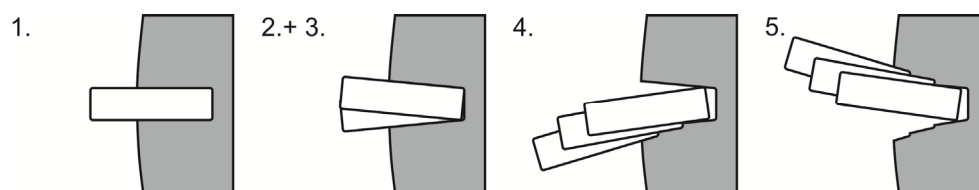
Gear machining with disc milling cutters according to Wermeister [11]
